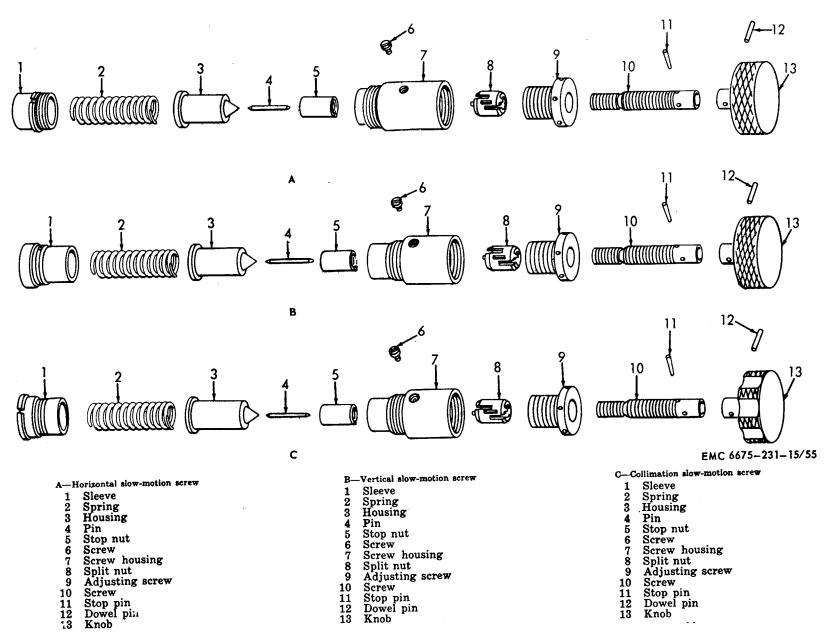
Horizontal, vertical, and collimation slow-motion screws, disassembly and reassembly.
